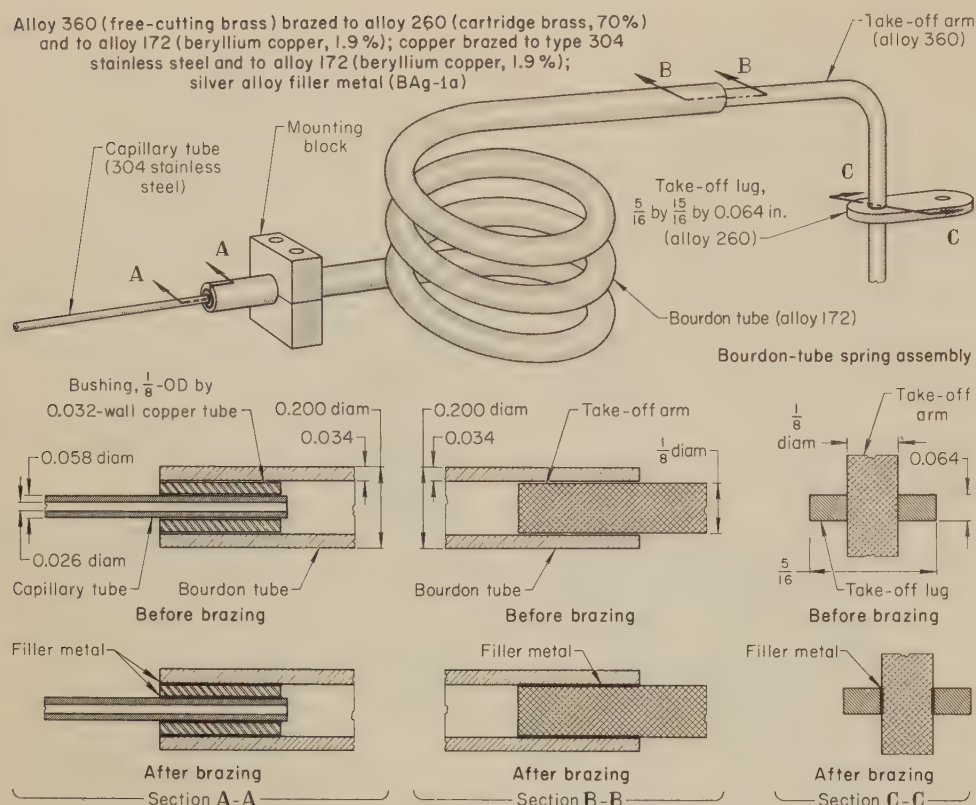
Torch brazed bourdon-tube spring assembly with components of five different copper alloys and a stainless steel (Example 645)
